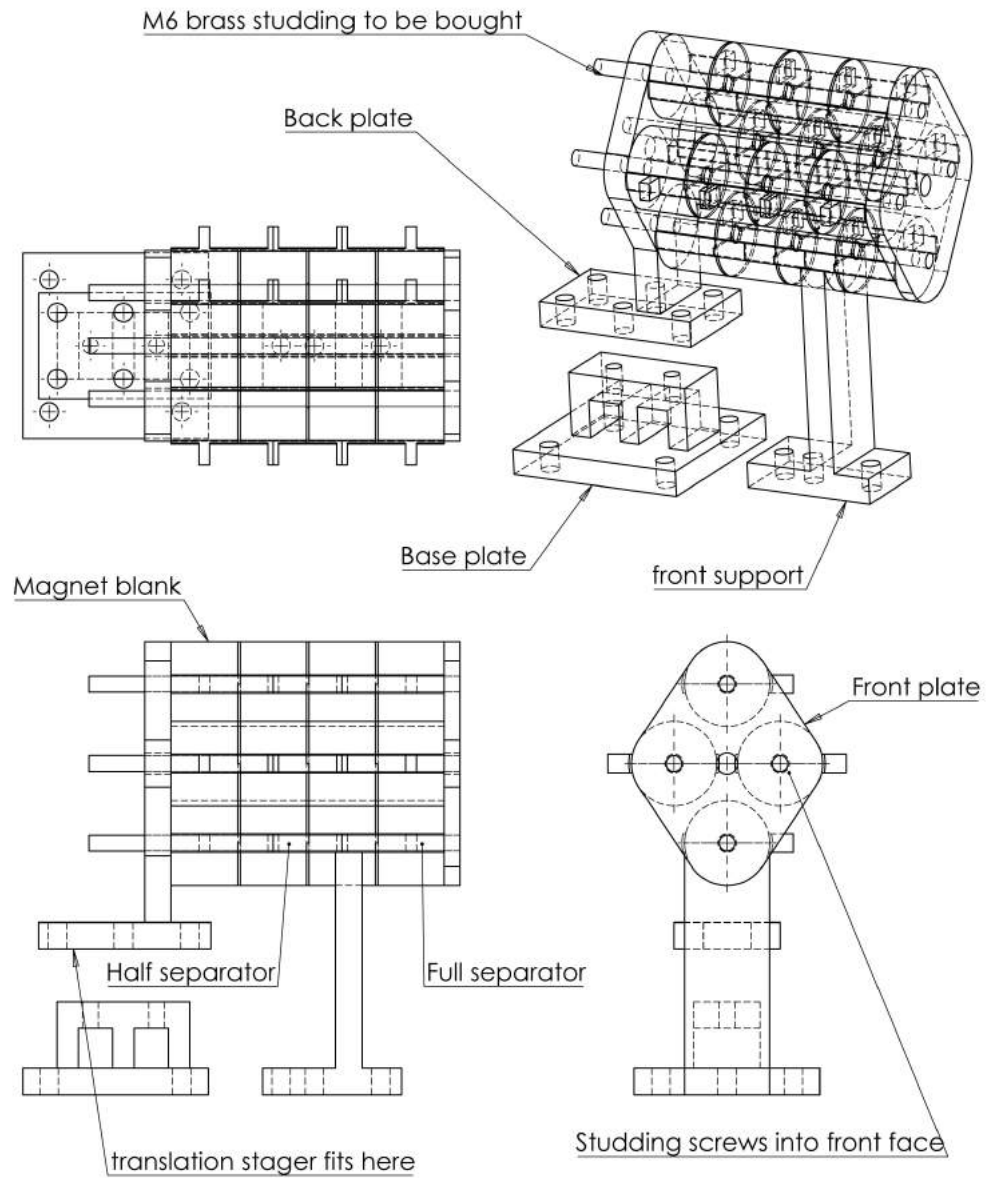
An assembly drawing of the mount for the permanent magnet compensation setup shown in Figure 4.10 which is integrated with a ThorLabs PT1/M single-axis translation stage. The dimensions of individual parts are shown in Figures B.42 – B.48.
